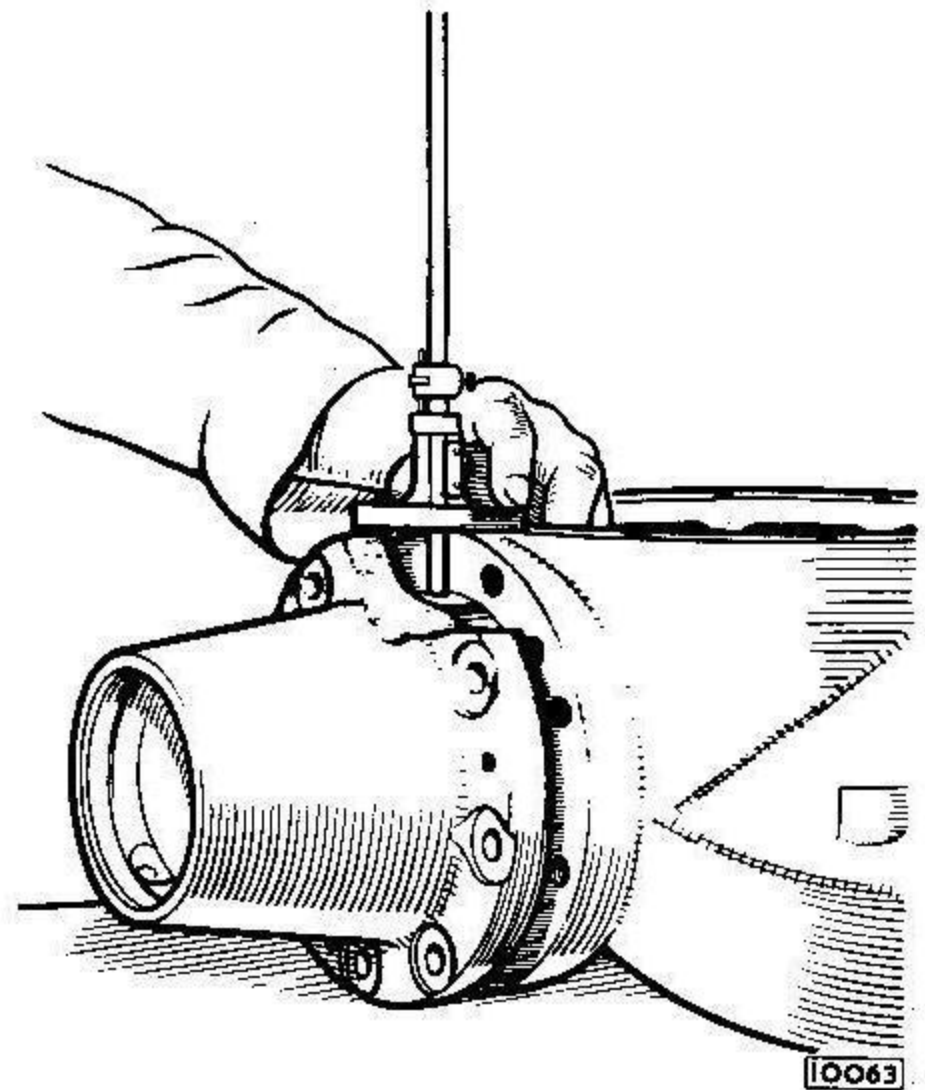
Checking the dimension from centre mounting face to the centre of the nose piece housing bore. To the dimension obtained as illustrated, add 3.00"
